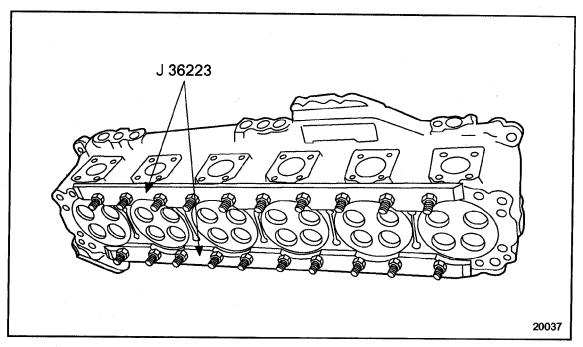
Cylinder Head Pressure Test Equipment Installation
